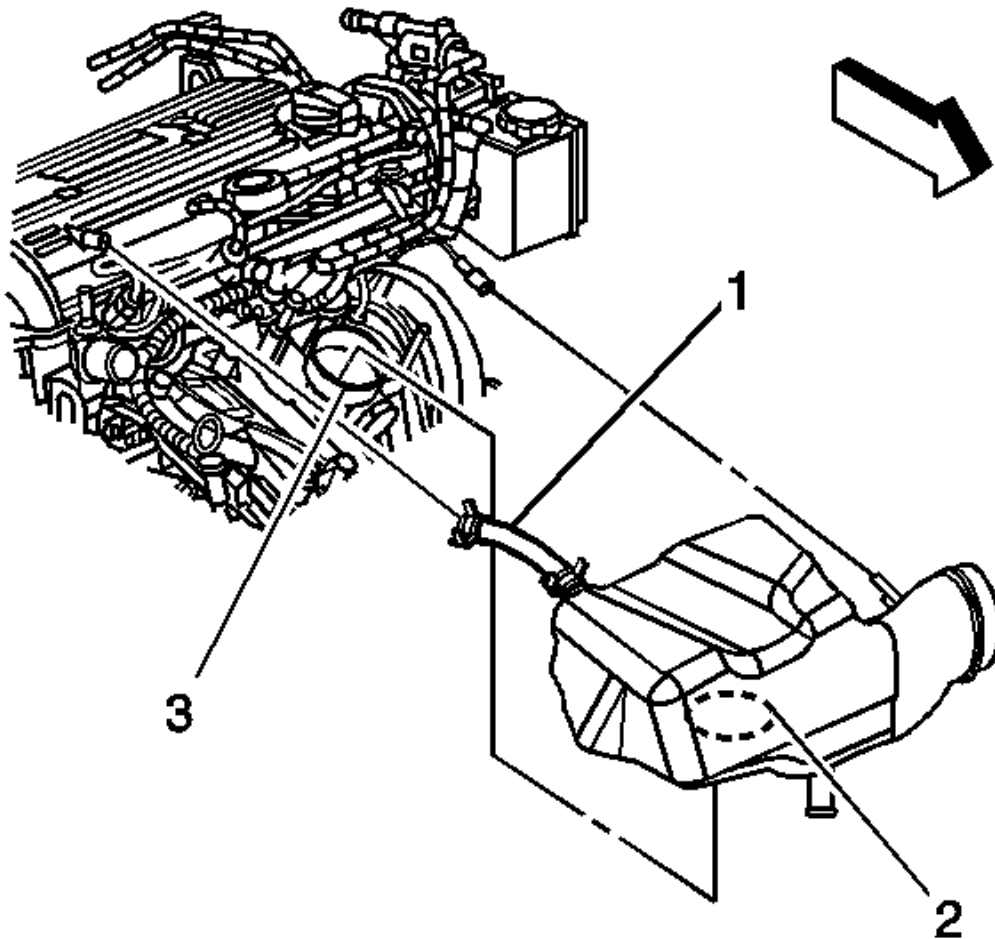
Exploded View Of Air Inlet Duct & Resonator
